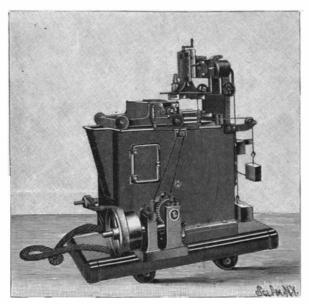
AUTOMATIC MACHINE FOR CLEANING THE PLATE.
